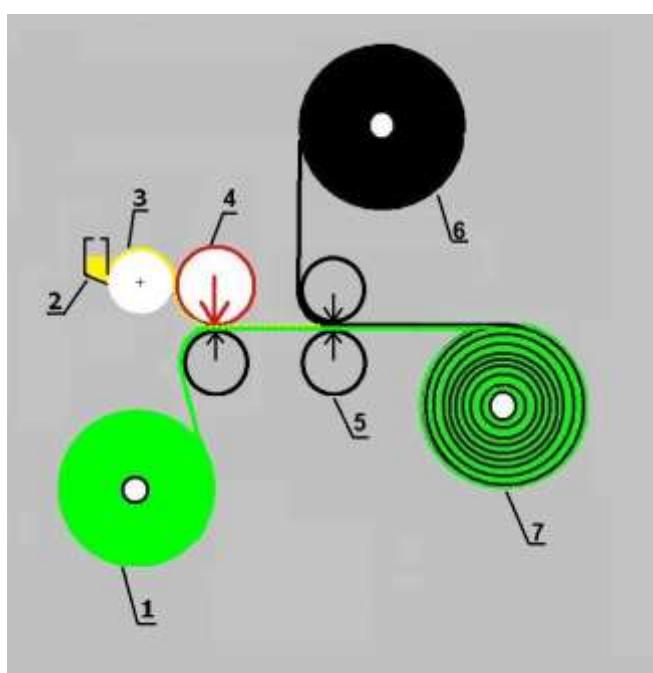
Unwinding (1, 6); hot-melt batch (2); dosing roller (3); coating roller (4), nip-rollers (5); winding (7). The schematic picture is only illustrative and the design presented hereto is not haven't to be met exactly.
